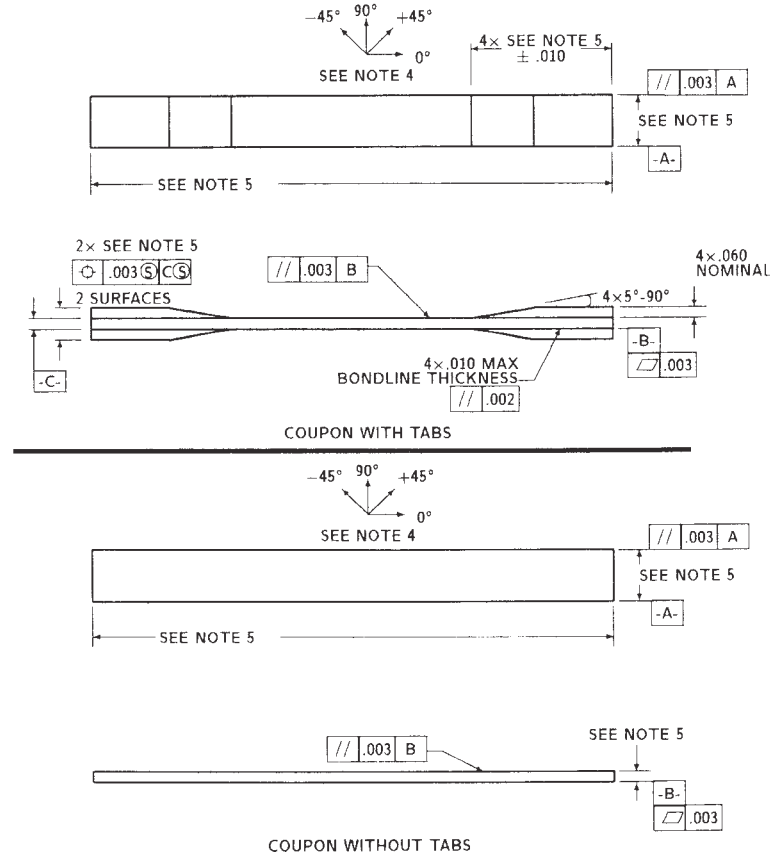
Tension Test Specimen Drawing (inch-pound)
